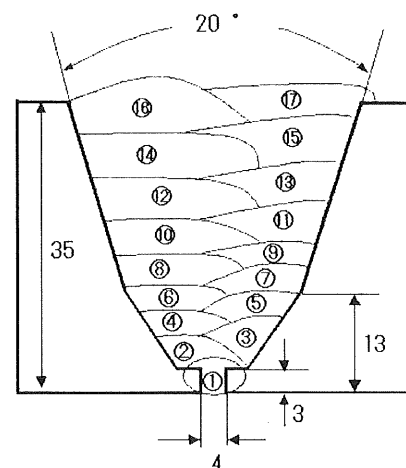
Schematic cross-section of pass sequence of weld joint
